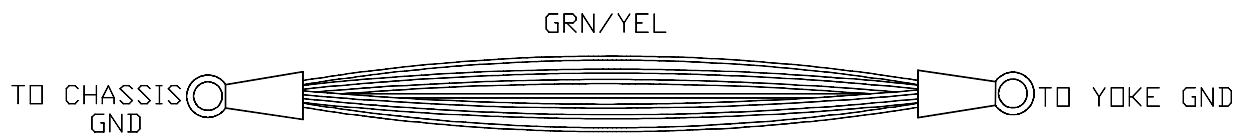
VL4000 Pan / Tilt Cable Assembly
